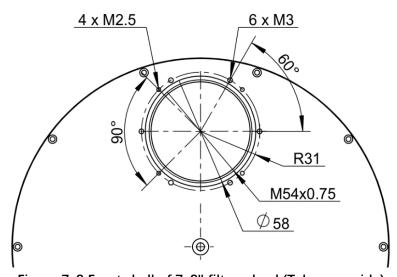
Front shell of 7x2" filter wheel (Telescope side)
